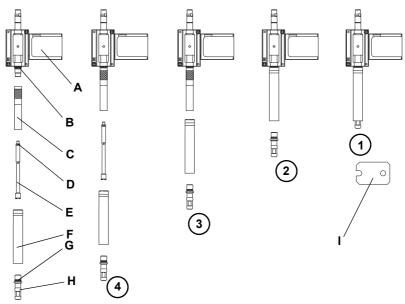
Air LiHa DiTi pick up mechanism removal/installation
